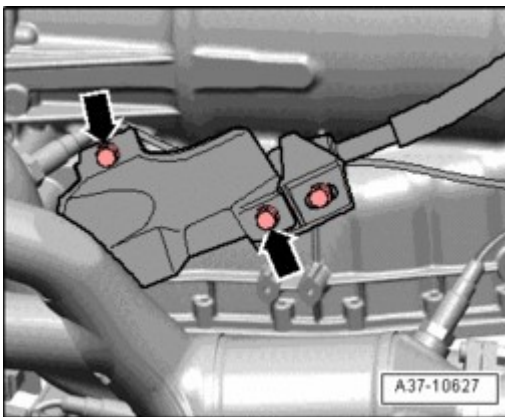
Removing Bolts & Selector Lever Cable Heat Shield
